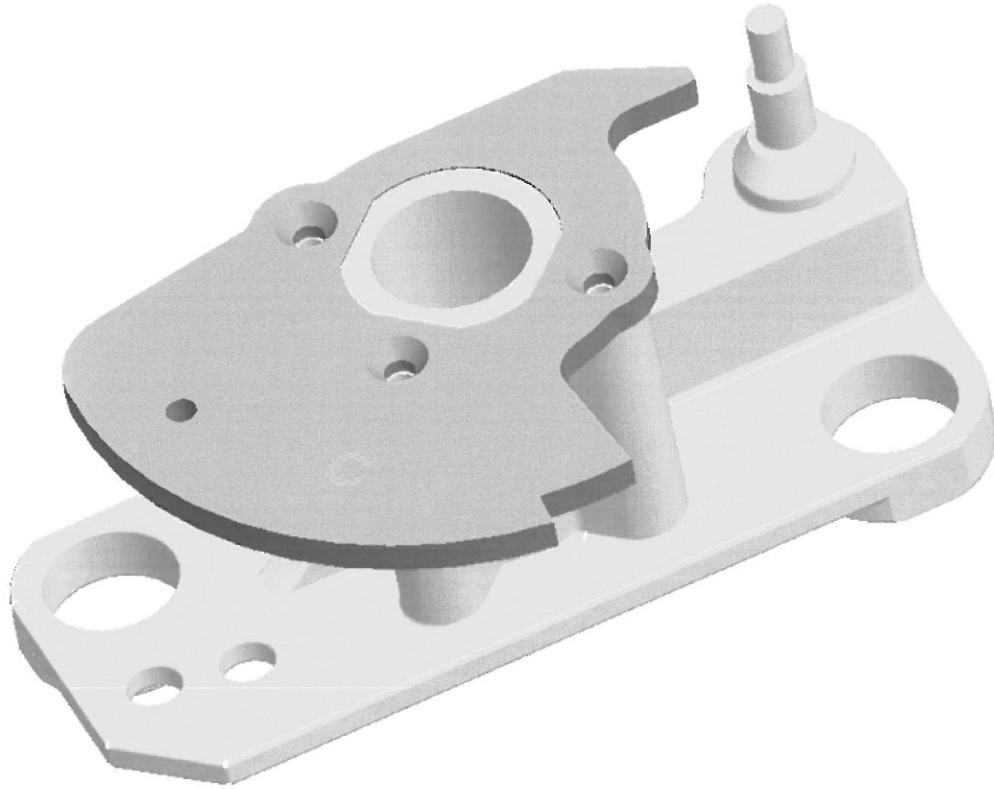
Cam 50626261-02 and -03 installed on teeter-lever base.
